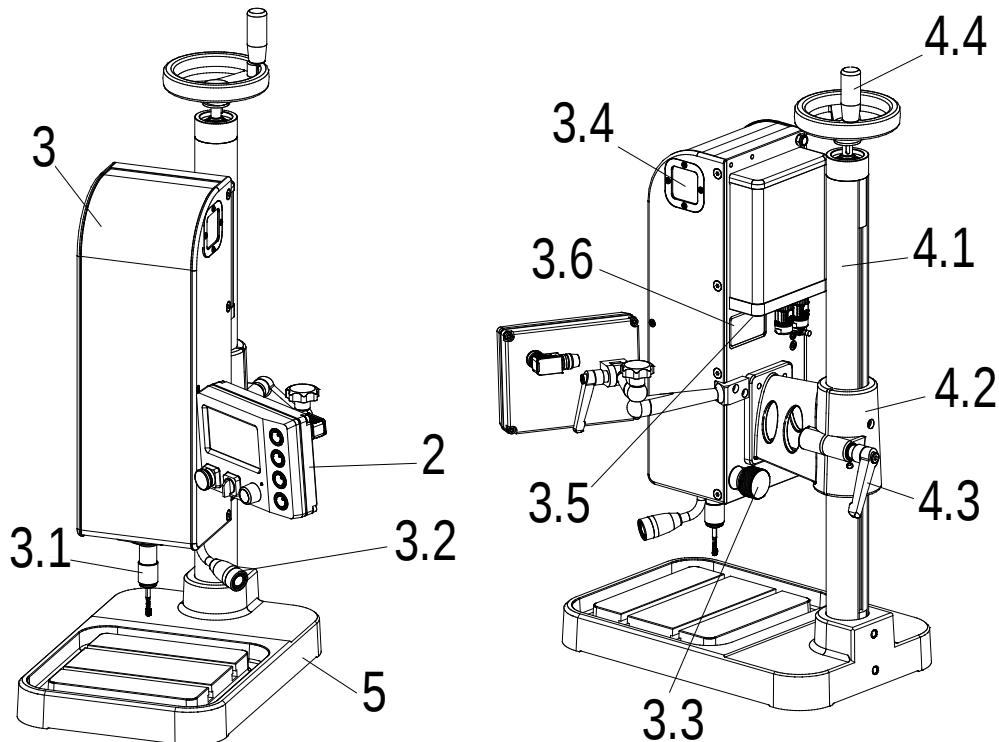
Rear and front view of the thread tapping machine with operating panel
